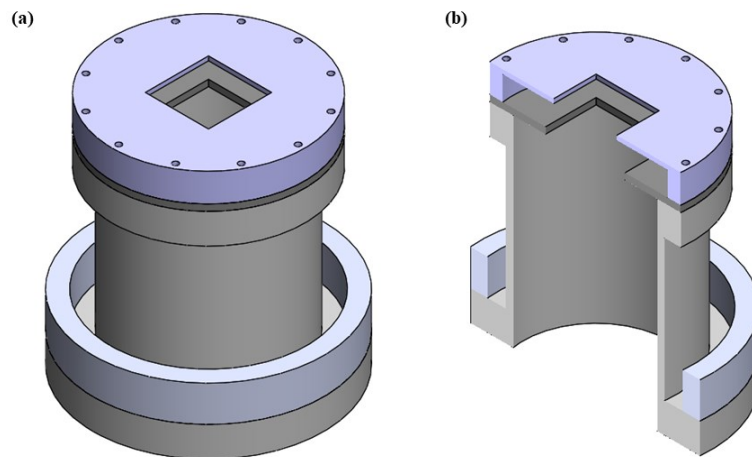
A 3D model of the cylindrical enclosure machined out of MDS-filled cast nylon to hold the microdevice and connecting wires inside: (a) isometric view, (b) sectional view.
